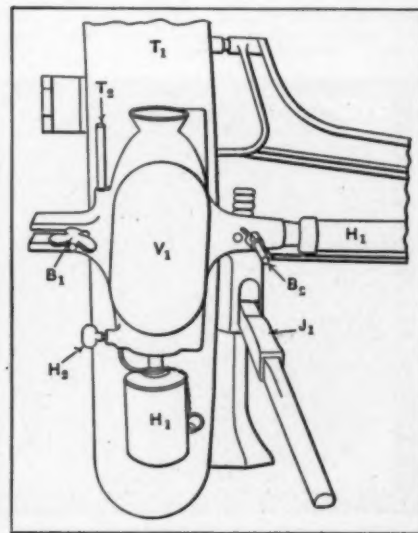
When the wound is located at the center of the tread the vulcanizer is clamped on by means of bolts at either side
